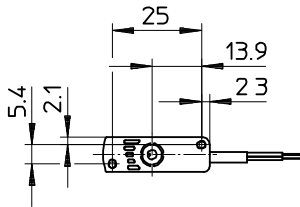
Flange hole pattern SPAE-...-F<sup>1)</sup>
